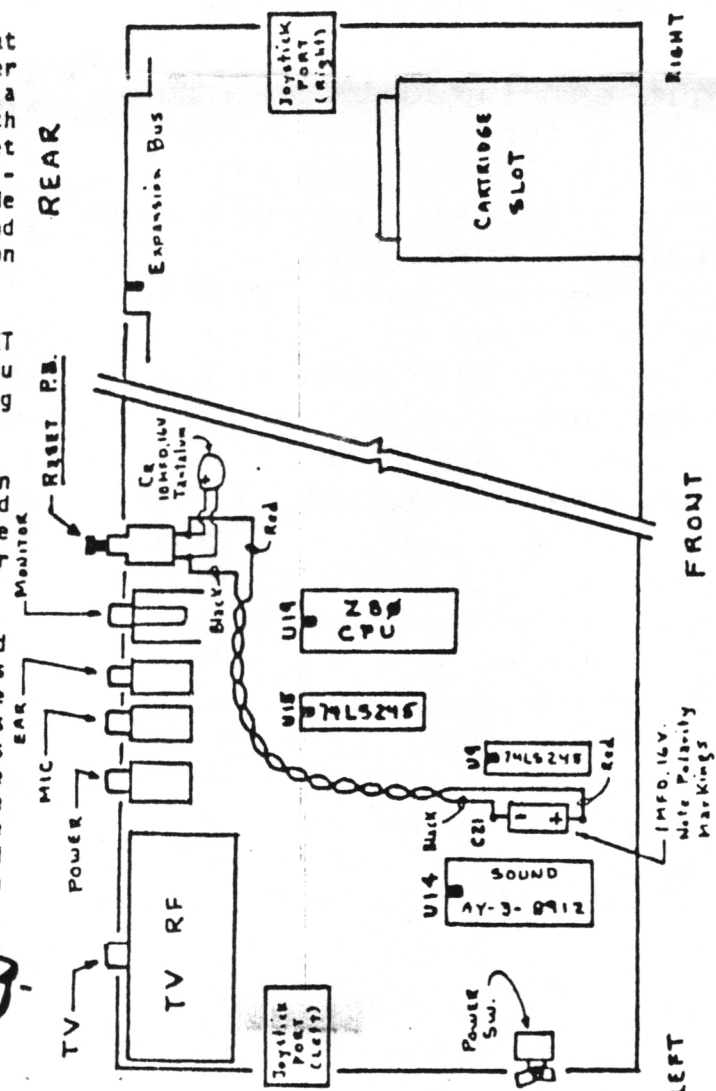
2068 COMPONENT LAYOUT, TOP VIEW
